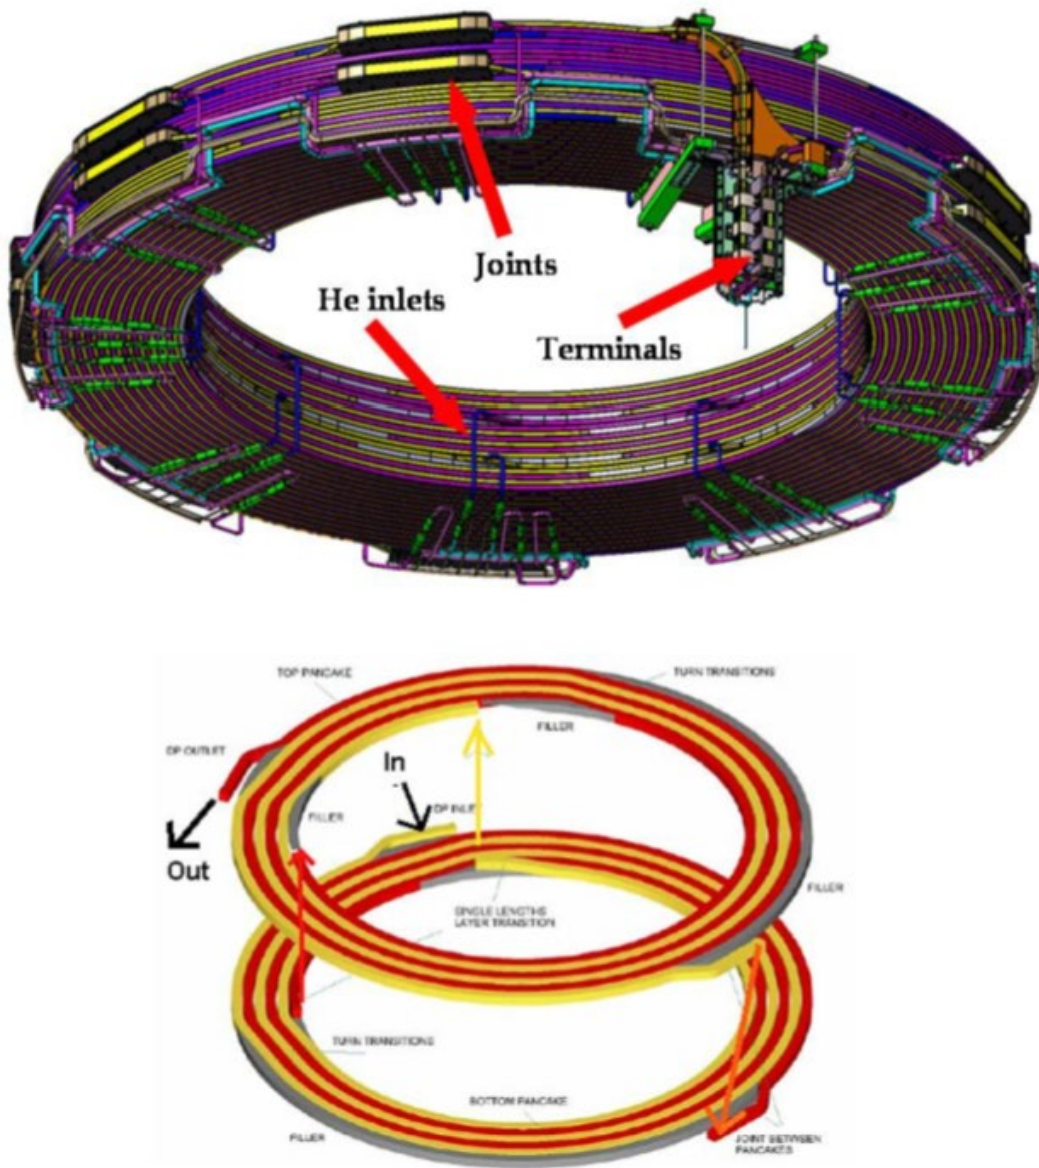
PF6 Winding Pack Layout (typical for all PFs) and two in hand double pancake scheme.
